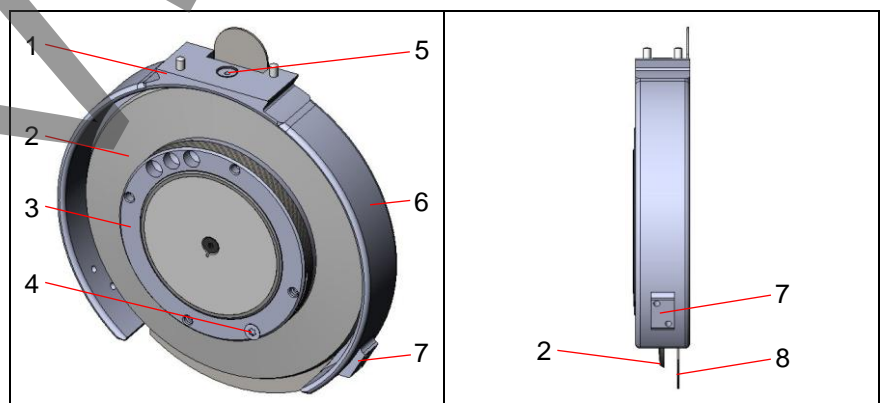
Shear cutting knife head with dished knife Ø150mm
